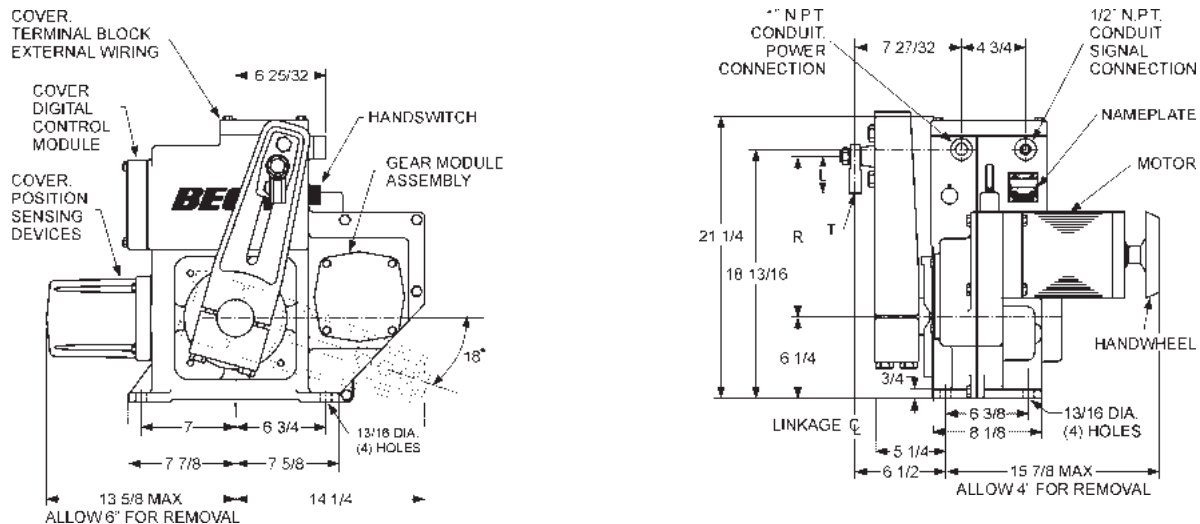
Models 11-200, 11-300 Outline Dimension Drawings
